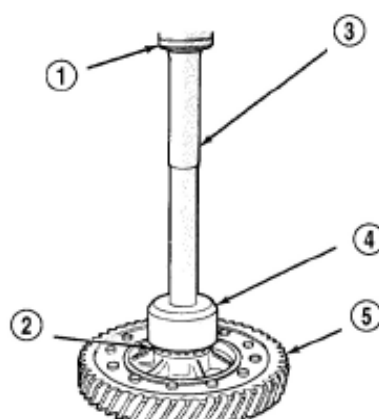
Installing differential bearing taper sleeve around ring gear
